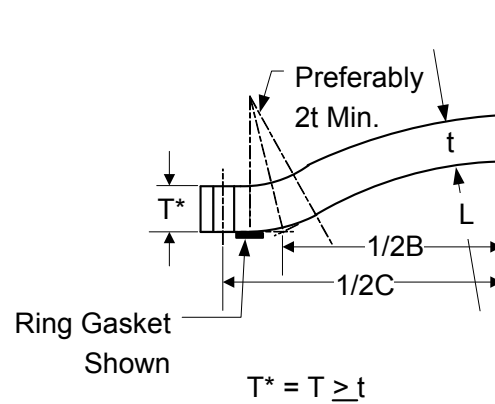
Type C Spherically Dished Cover with a Bolting Flange
